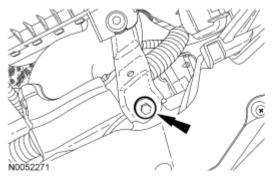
Locating Engine Breather Courtesy of FORD MOTOR CO.
